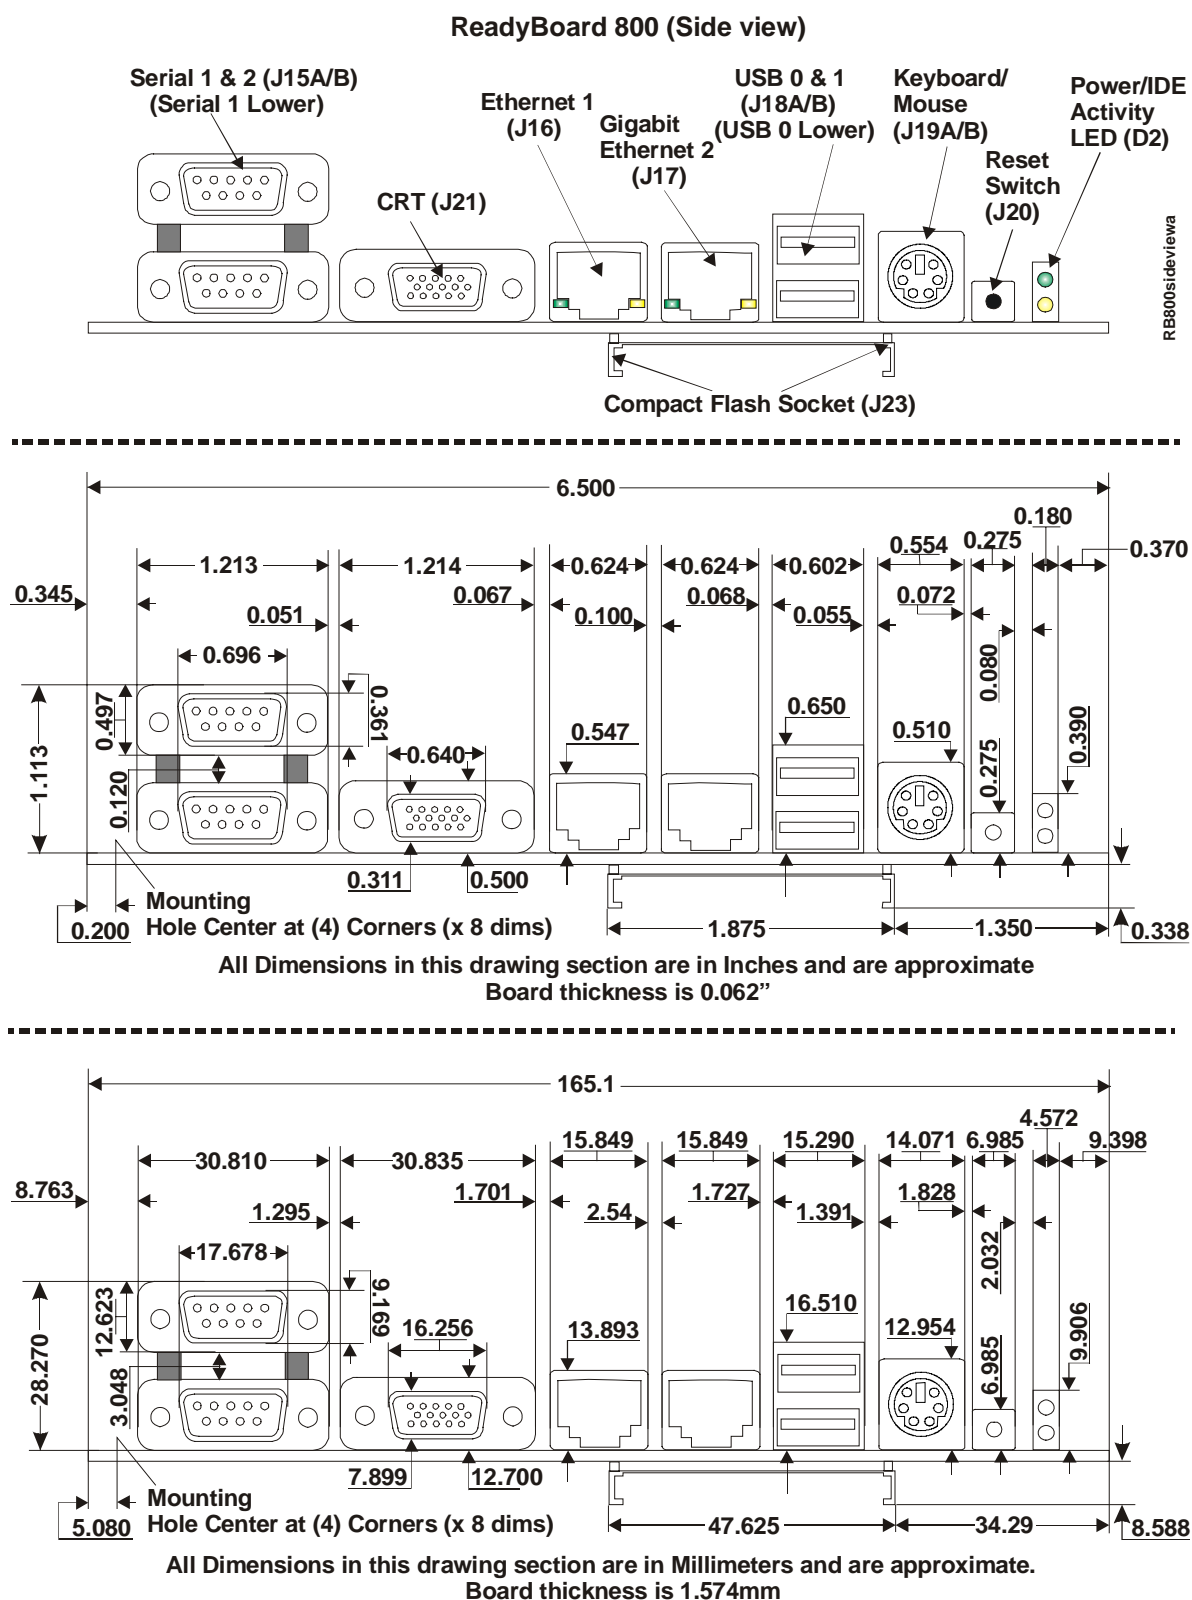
ReadyBoard 800 Panel Dimensions (Side view)
